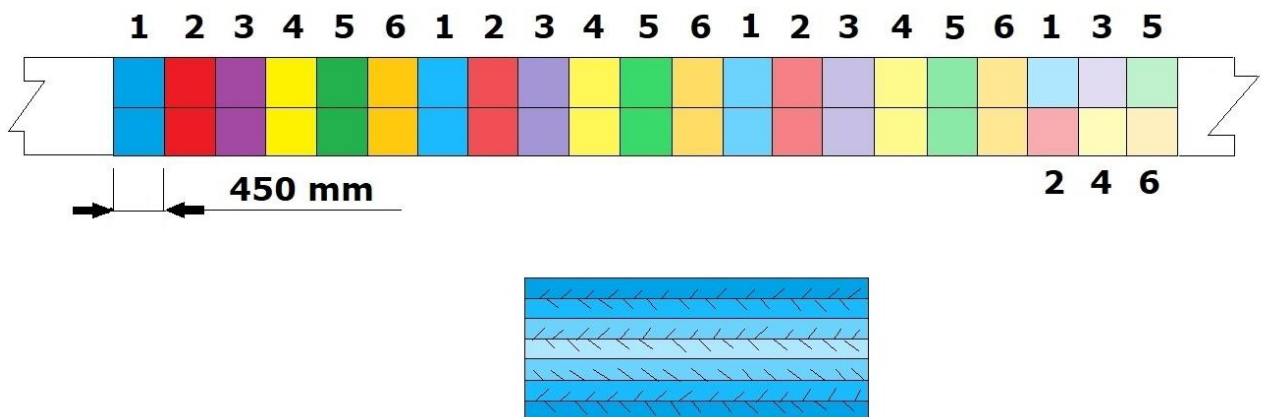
Veneer sheets placement in a 7-ply plywood panel
